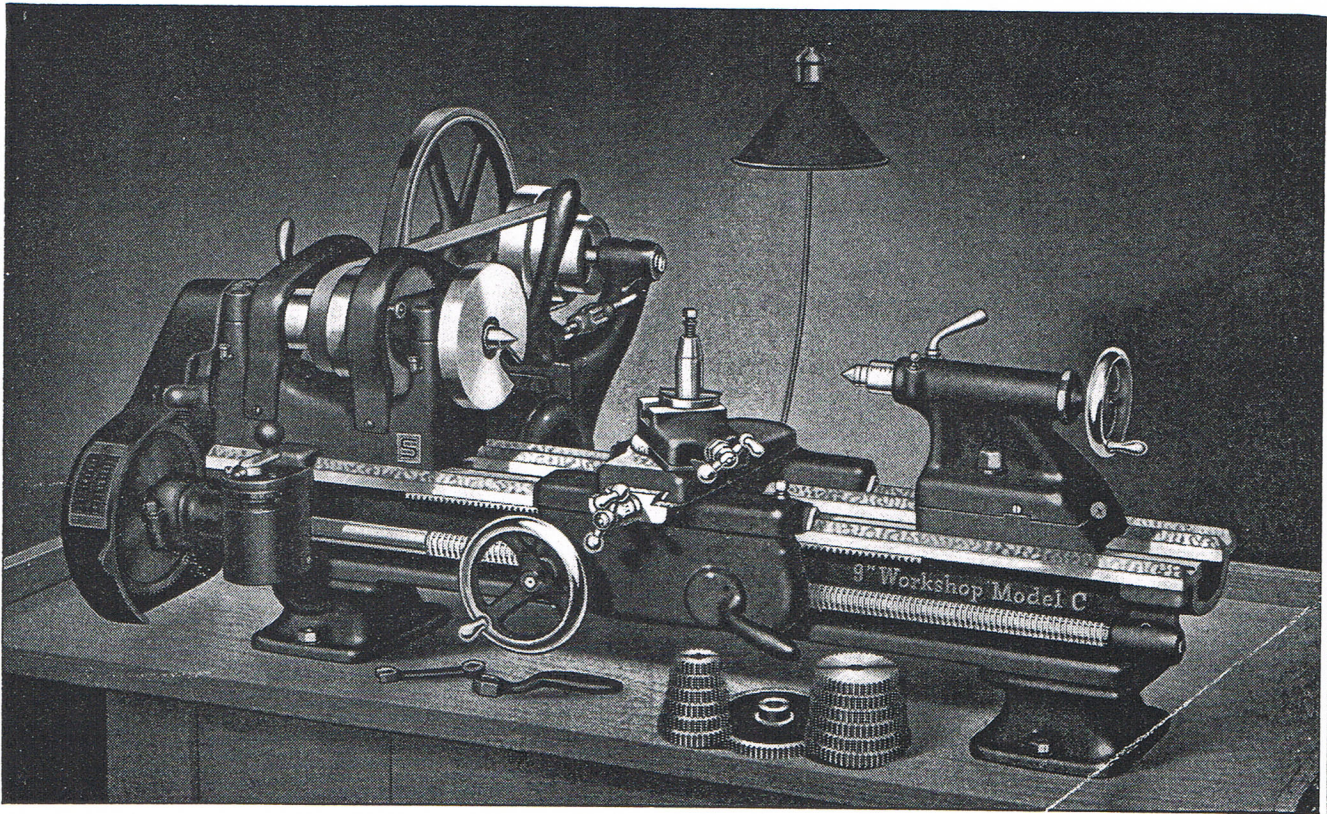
9-inch "Workshop" South Bend Horizontal Motor Driven Lathe—Model C.
